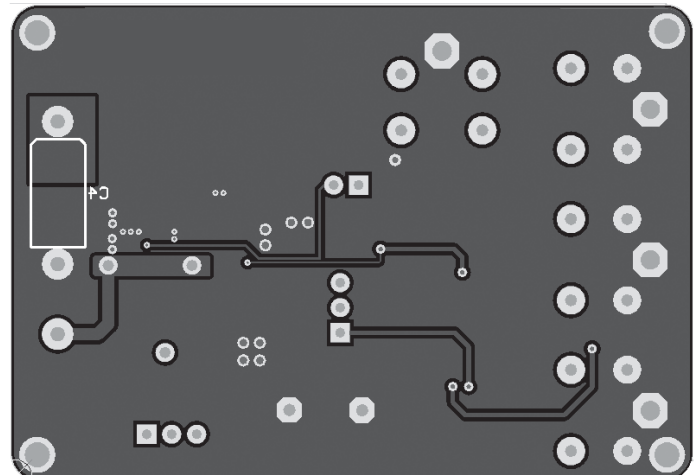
AAT1278 Evaluation Board Bottom Side Layout.
